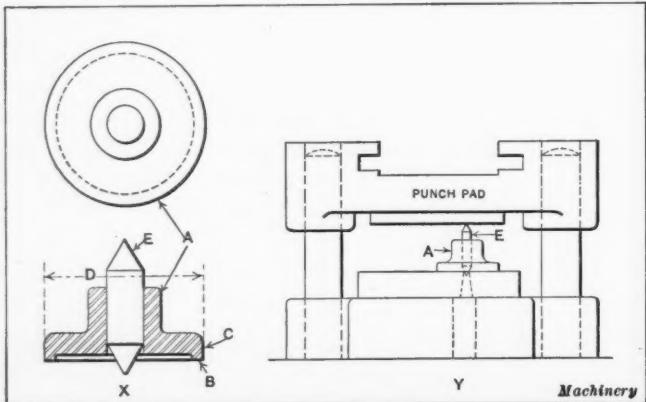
(X) Centering Plug for transferring Holes; (Y) Application of Plug to a Punch and Die Job
